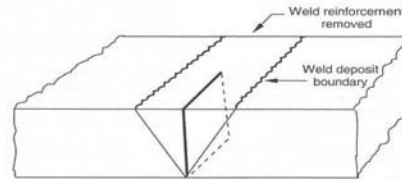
Location of Notch for Weld-Metal Specimen
